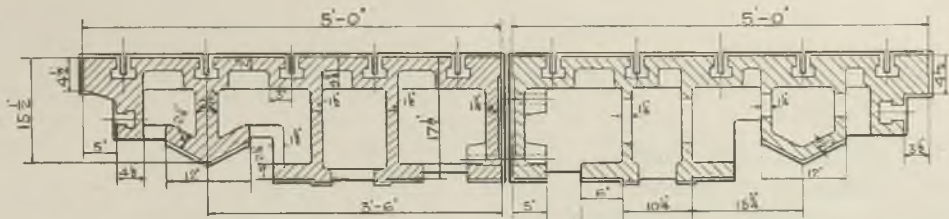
(LEFT) NEW AND IMPROVED DESIGN AND (RIGHT) DESIGN OF THE PLANING MACHINE BED WHICH FRACTURED.
